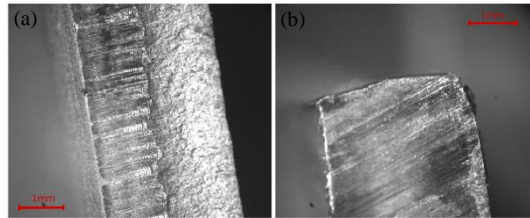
Sheared edge specimens (a) front view, (b) side view
